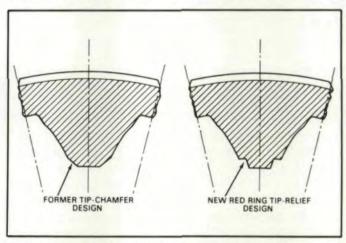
Conventional broached internal gear tip chamfer and improved tip relief, length-of-roll-control design.
